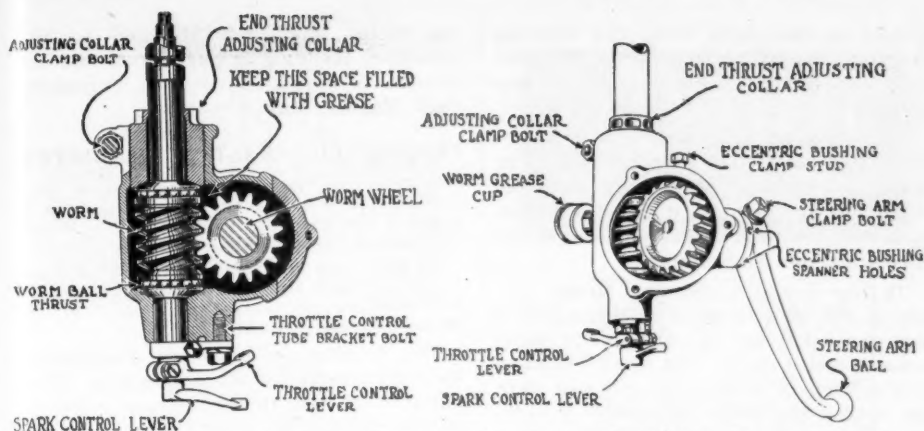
Conventional worm type steering gear illustrating the irreversible principle
